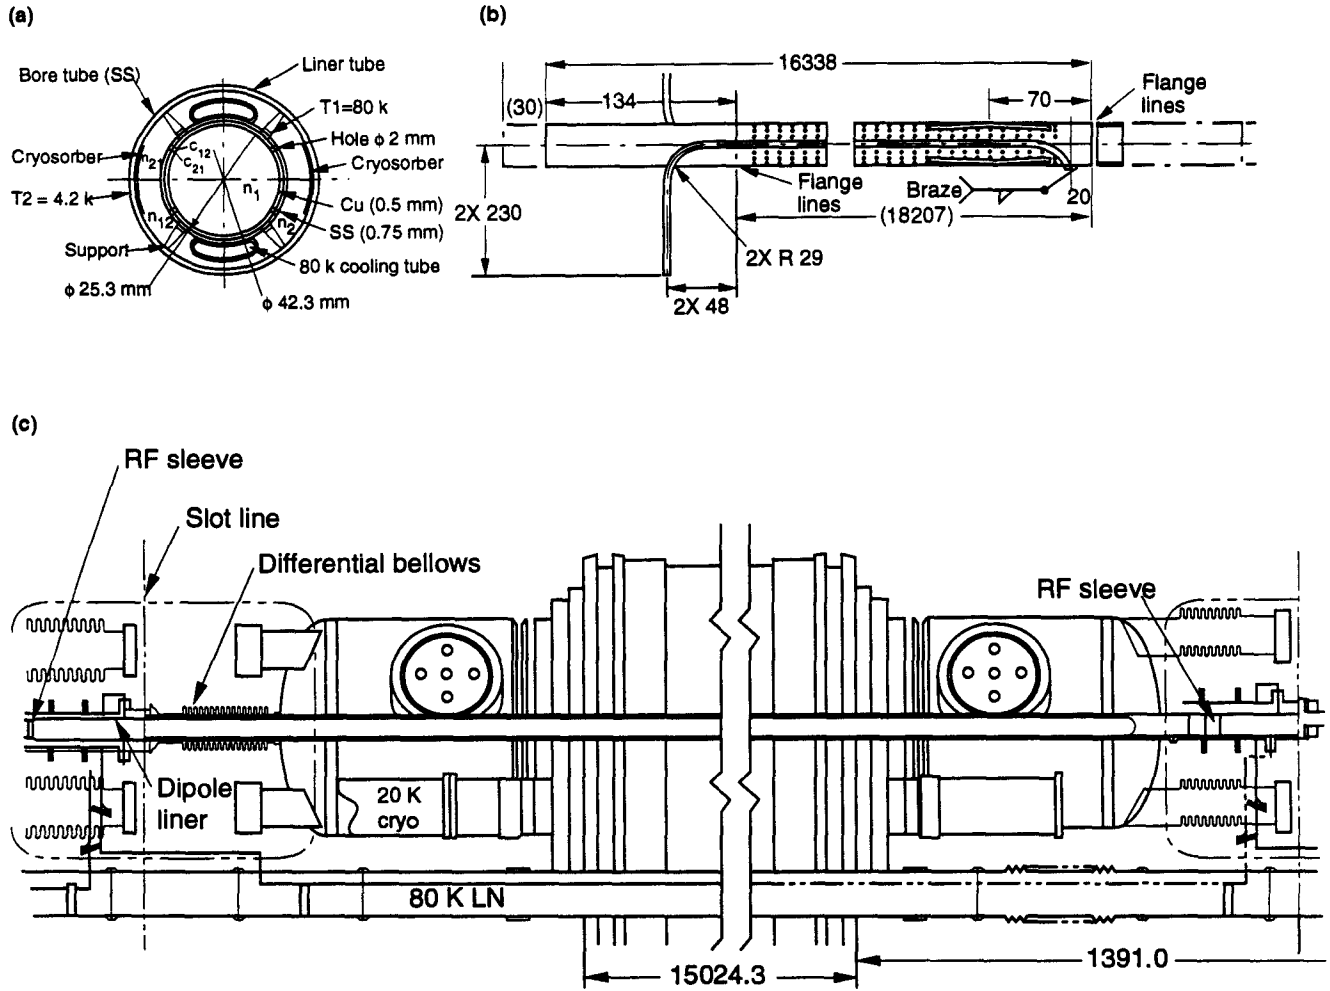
(a) A Cross Section of the 80 K ASST Quadrupole Liner Tube; (b) an 80 K ASST Quadrupole Magnet Liner Tube; (c) End Assembly of a Quadrupole Liner.
